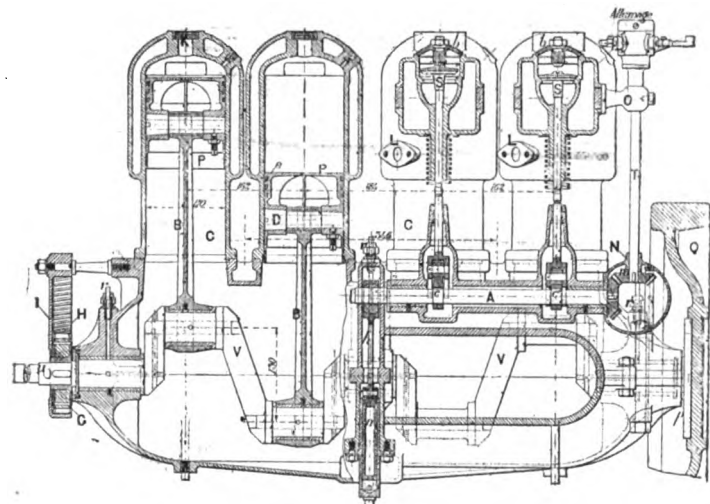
Section of Ballot 24-30-h.p. Four-cylinder Motor.
